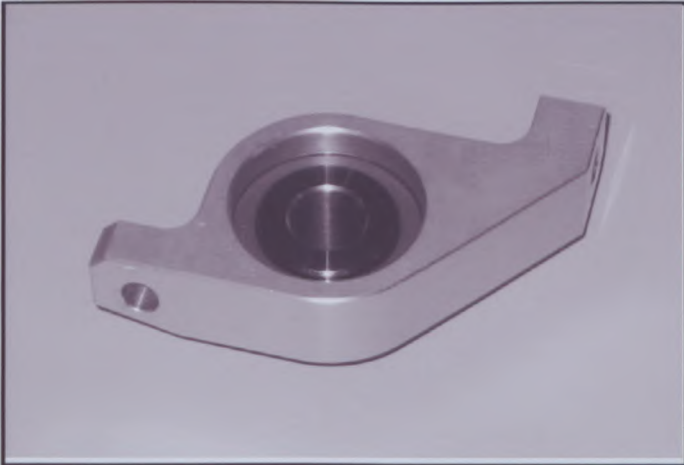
Fr. anti-roll bar mounted
